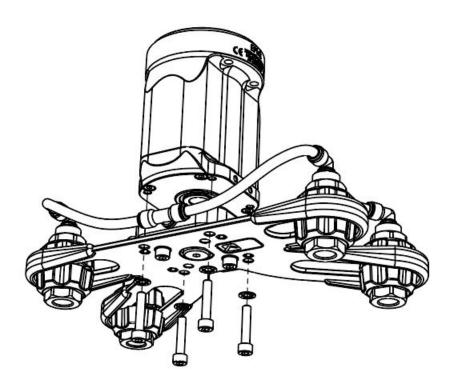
Mounting example of the four suction cups assembly on the vacuum generator
